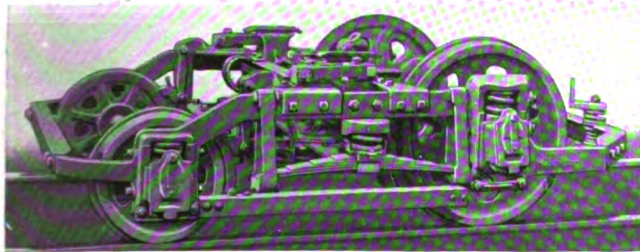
BRILL SINGLE-MOTOR TRUCK NO. 39-E
